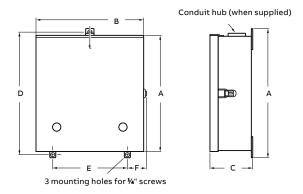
, Enclosed CR360L type 12, 3R, 4/4X 3-point mounting
